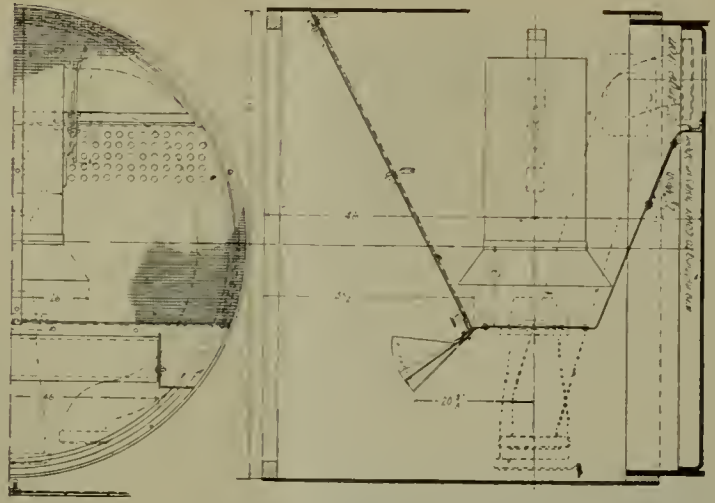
STANDARD FRONT END ARRANGEMENT—C. & A. RY.
